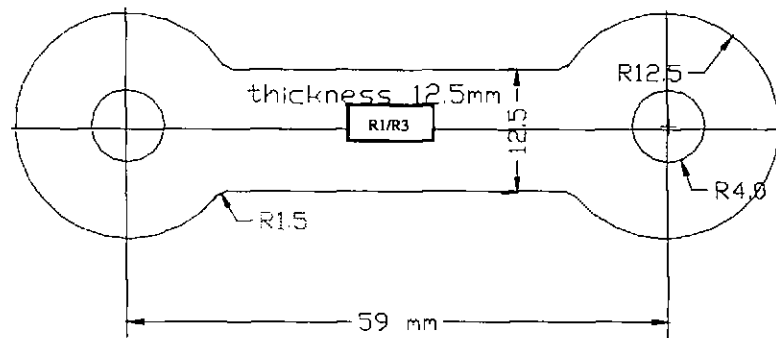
A.3 A 'dogbone' dimensions and gauge placement
